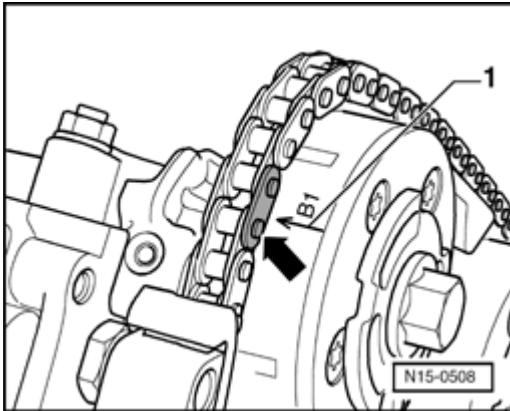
Copper-Colored Chain Link & Marking (Intake Camshaft)
